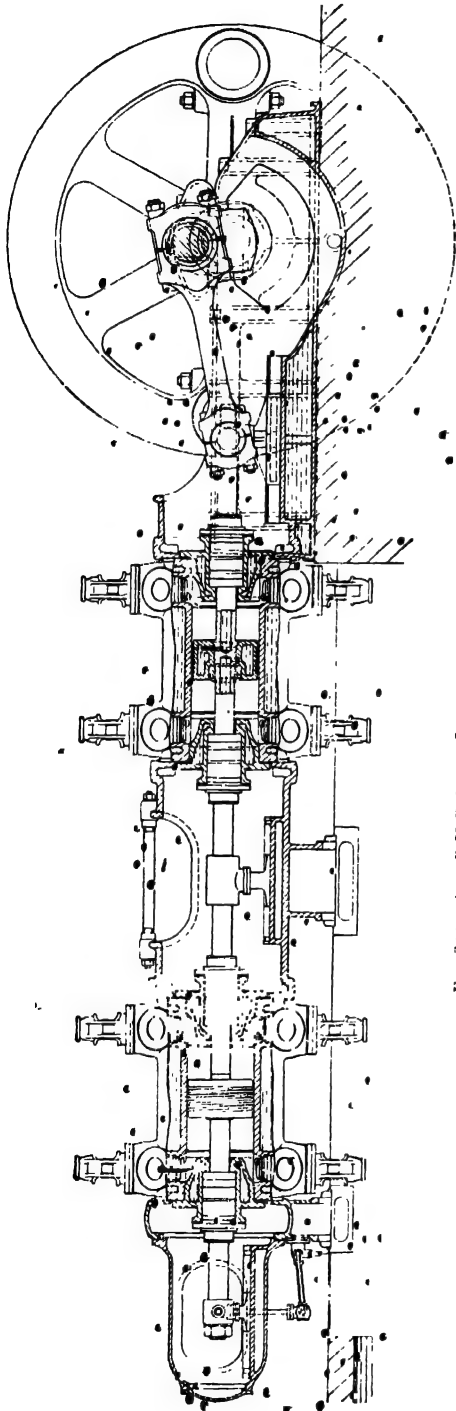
2000 B.H.P. Tandem Double-acting M.A.N. Diesel Engine
